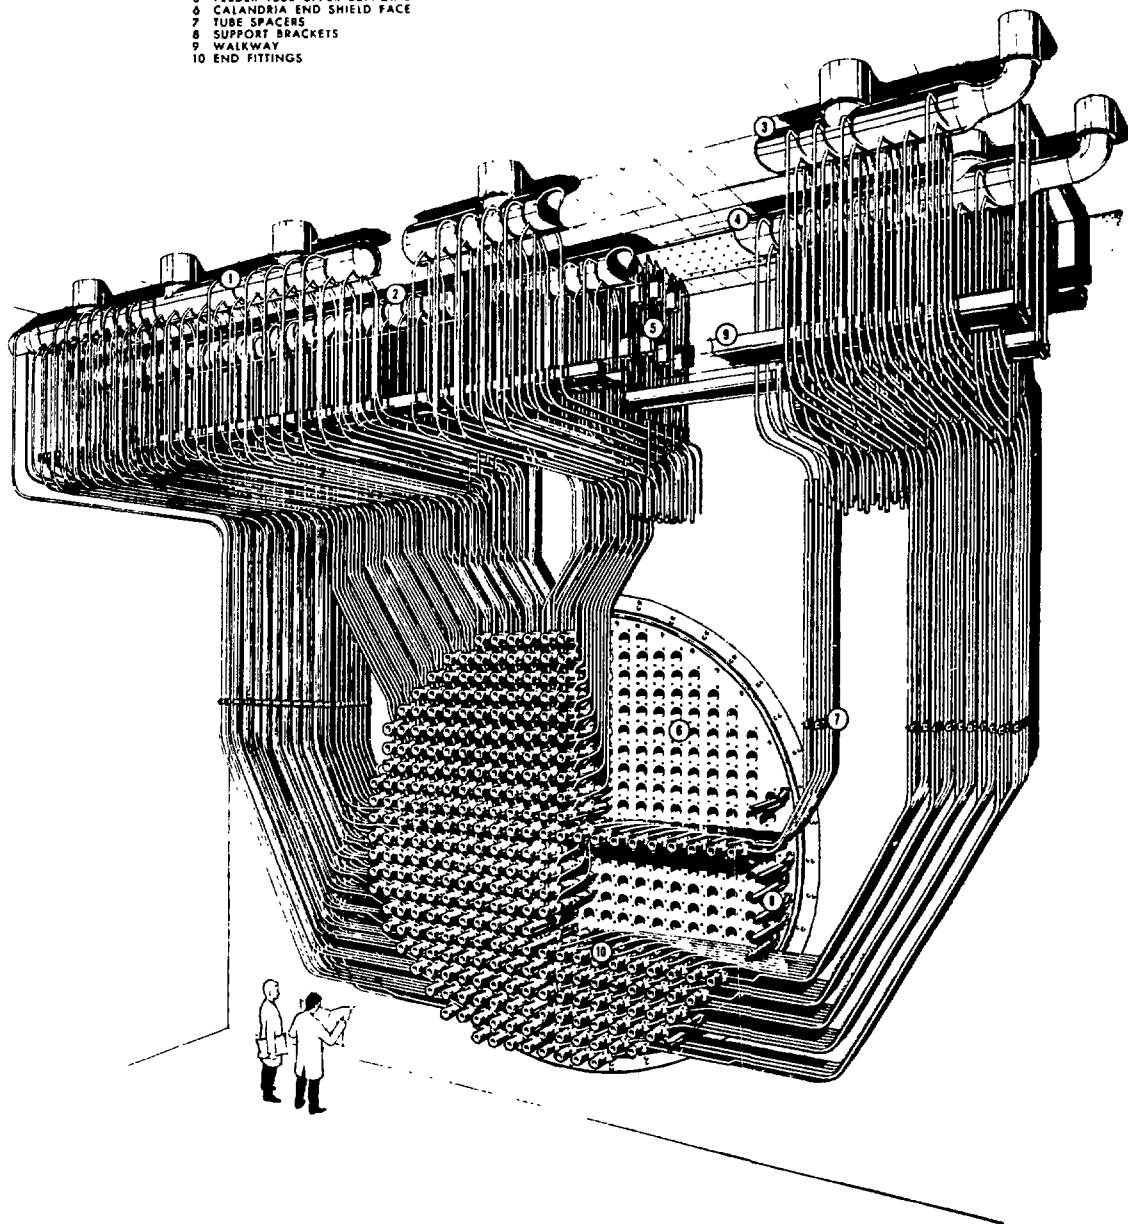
CALANDRIA FACE FEEDER TUBE ARRANGEMENT
